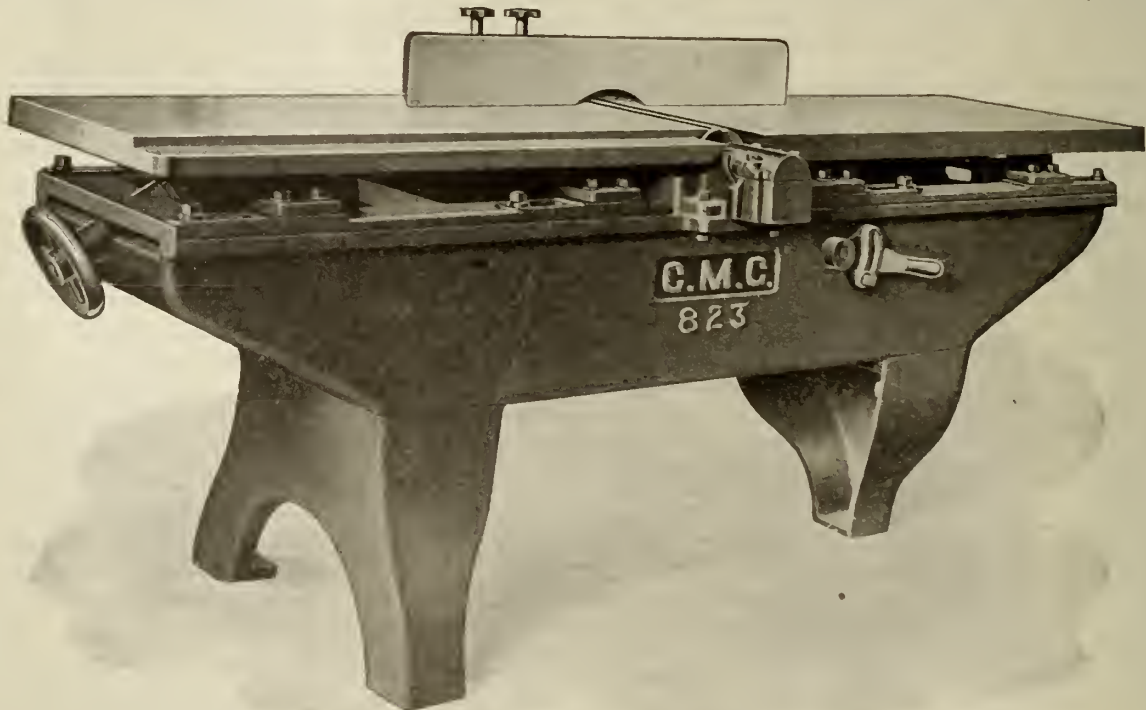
SHOWING A MODERN BUZZ PLANER AND JOINTER.
